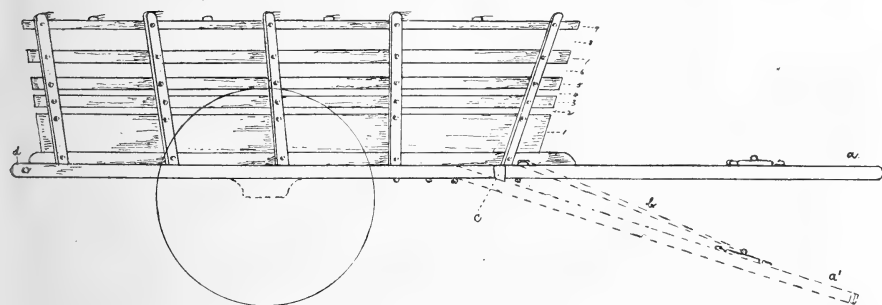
Vertical section through cart:—(a), shaft 6 ft. 2 in. to draw-bar; (a'), shaft in position for dipping; (b), inclined board, hooked on and resting on shafts for sheep to walk down after draining; (c), wood block to retain cart in position after releasing top bar and lowering shafts; (d), end to attach to bath; sides of cart, lowest board (1), 10 in. \times 1 in.; laths (3), (5) and (7), 3 in. \times 1 in.; top bar, 2 in. \times 2 in.; wheel, 3 ft. 11 in. diameter.
